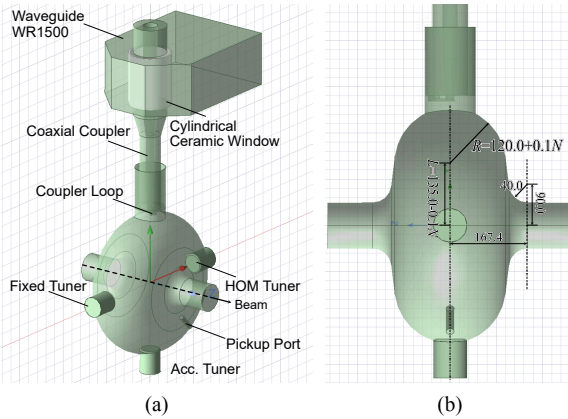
(a) Cavity and waveguide coupling.(b) Cross-sectional view of the bell-shaped cavity.
